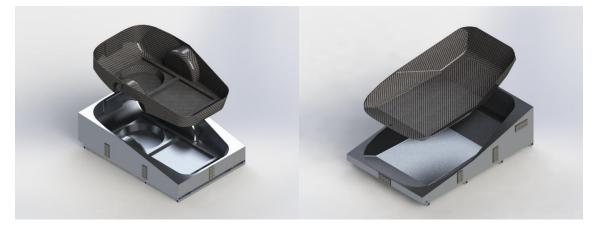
Body mold (left) and lid mold (right) with composite parts floating above
